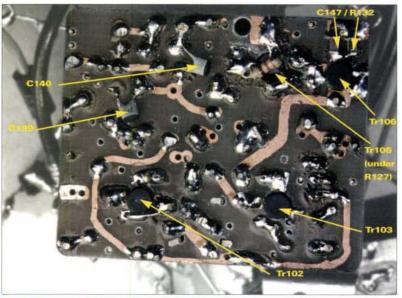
The copper track side of receiver local oscillator and first mixer board.
